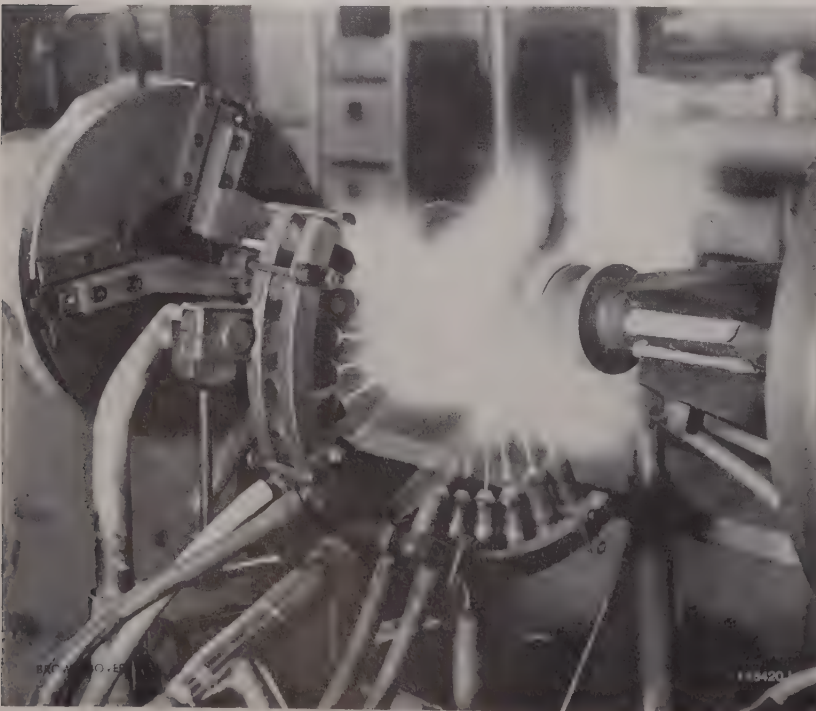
Making a glass seal with flames, a ring of burners being used to fuse glass and Kovar together on a lathe
